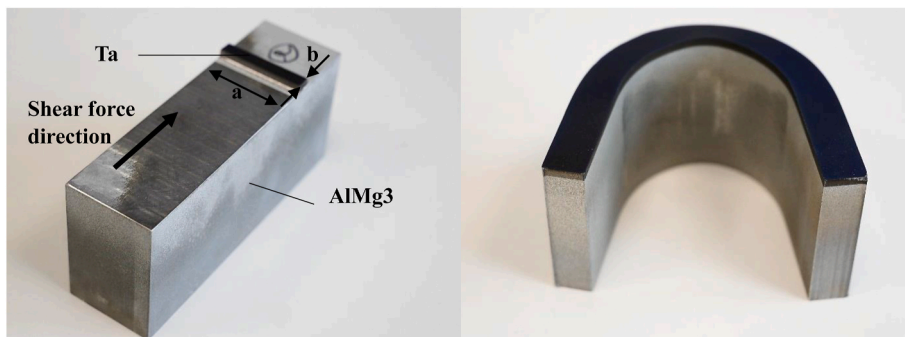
Shear (left) & bending (right) test samples of the explosive-clad plate
